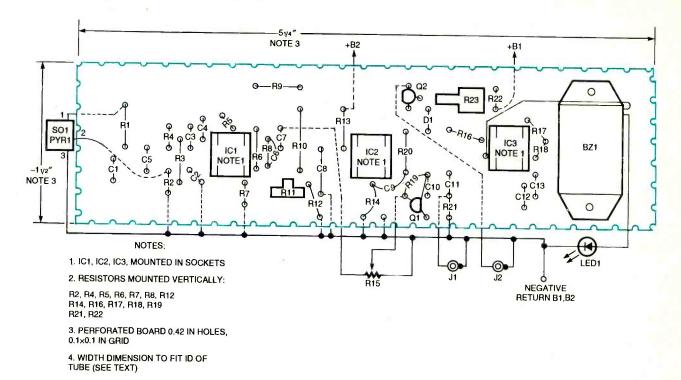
LAYOUT OF THE CIRCUIT BOARD showing optimum component placement for point-to-point wiring. The circuit board width is determined by the inside diameter of the housing tube.
